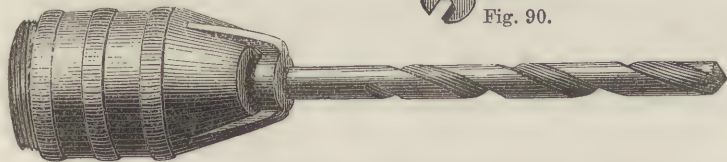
UNIVERSAL CHUCK, WITH A STRAIGHT-SHANK DRILL.
